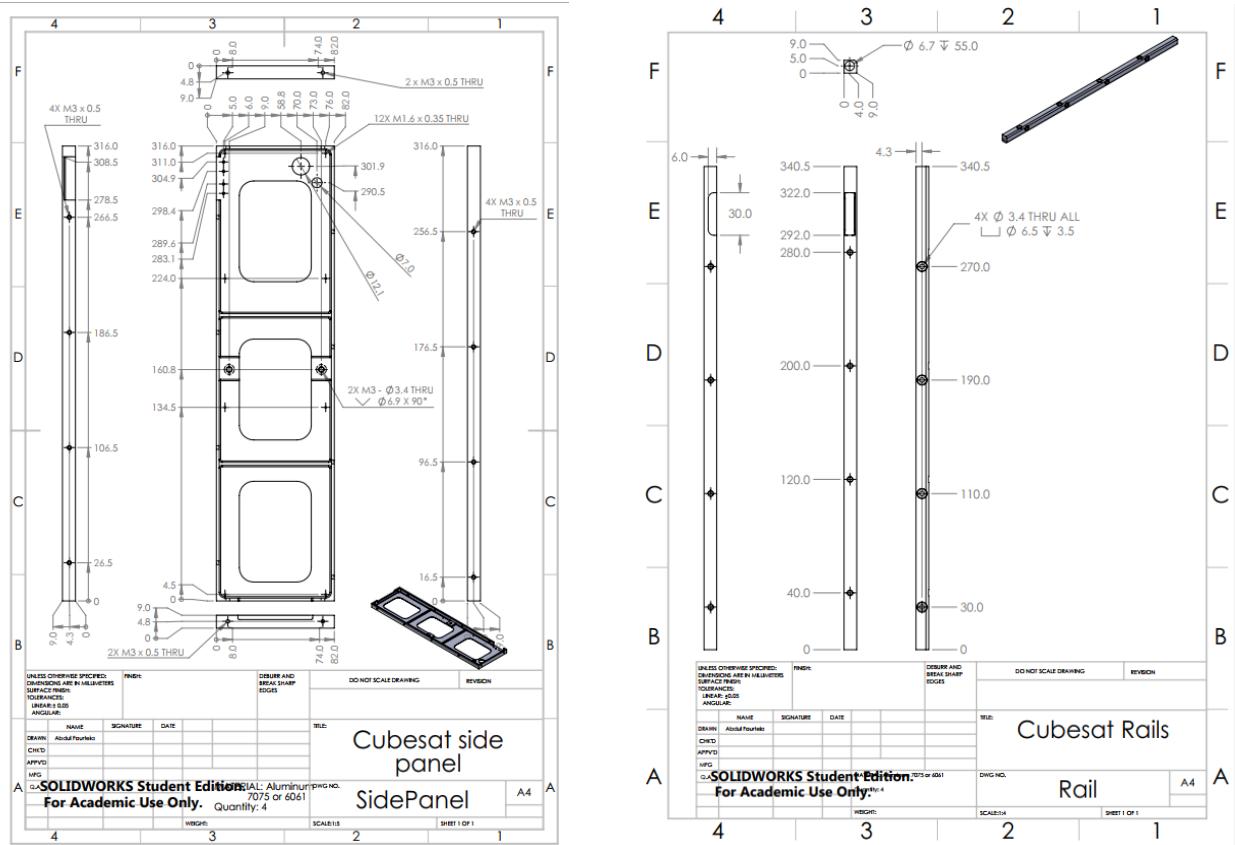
Sample of the engineering drawing of the CubeSat structure. Due to the tight tolerances and complexity, the manufacturing was outsourced to a local machining company.
